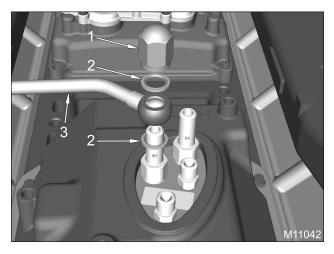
High-pressure pump to cooler tube assembly, M12 cap nut, and M12 bonded seal washer
